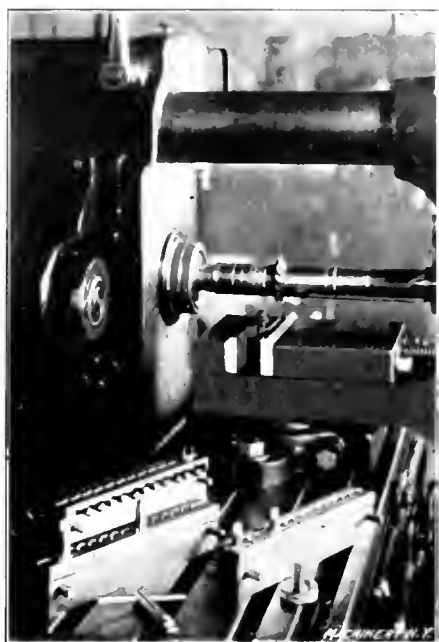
Milling the Slots in the Pieces A, Fig. 7
